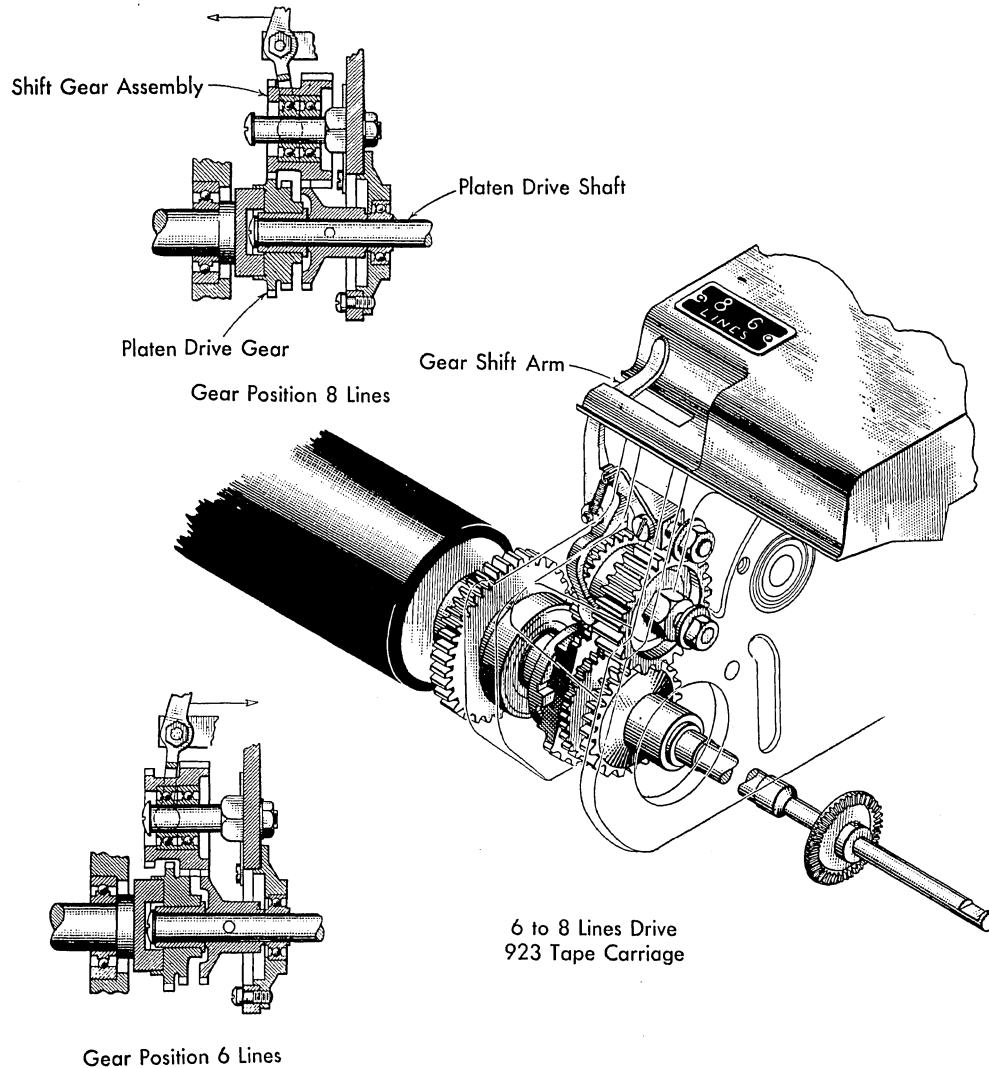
Six- or Eight-to-the-Inch Line-Spacing Device
